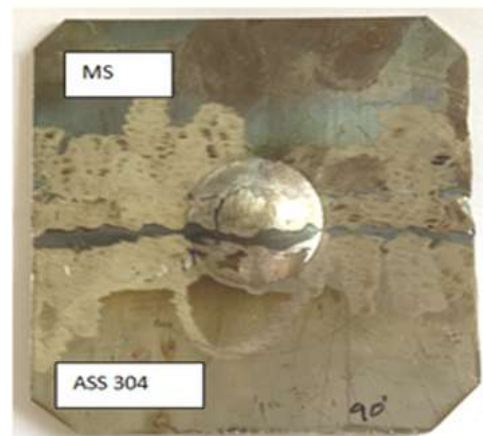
Deformed sheet metal welds specimens after Erichsen cupping test
